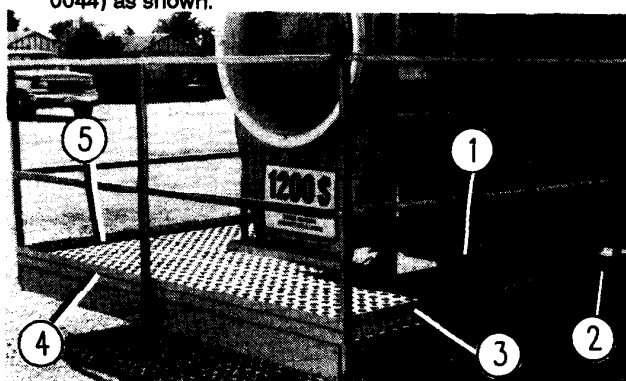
PLATFORM TOE BOARD ANGLES.
